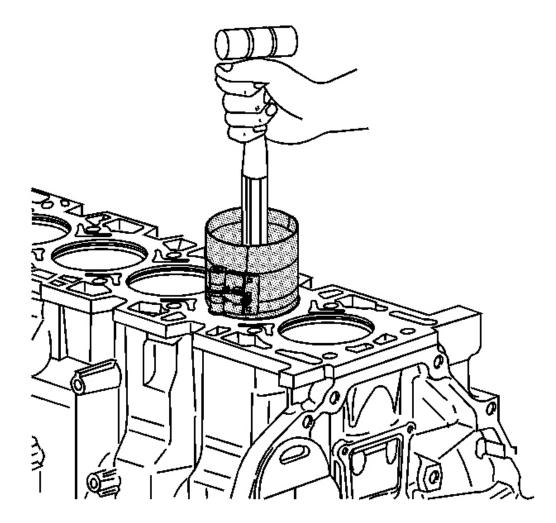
Tapping Piston Rings Into Cylinder Bore Courtesy of GENERAL MOTORS CORP.
